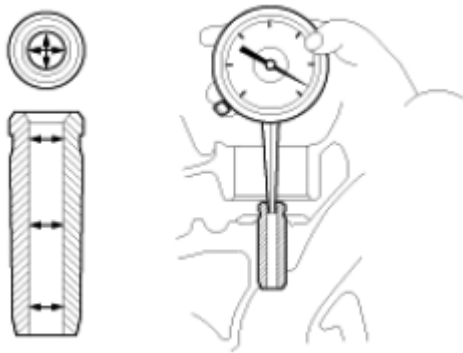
Measuring Inner Diameter Of Valve Guide Using Caliper Gauge
